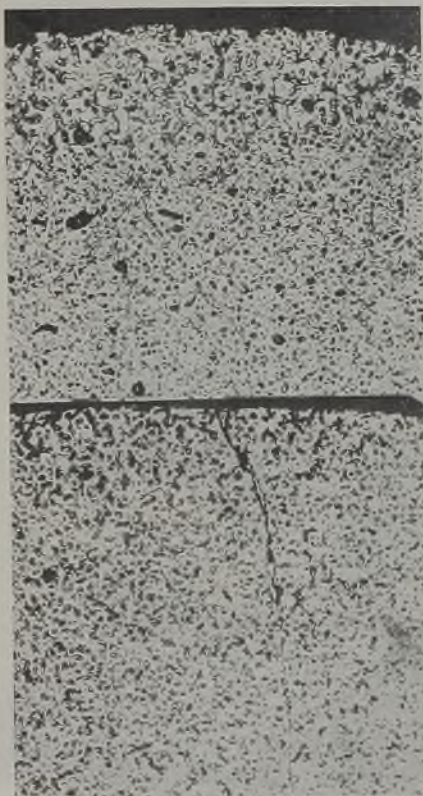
Micrographs of roots of welds in Fig. 3. Weld below made without reverse bevel discloses crack at top. Weld above made with reverse bevel
